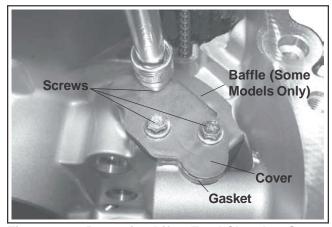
Removing Lifter Feed Chamber Cover Components.
